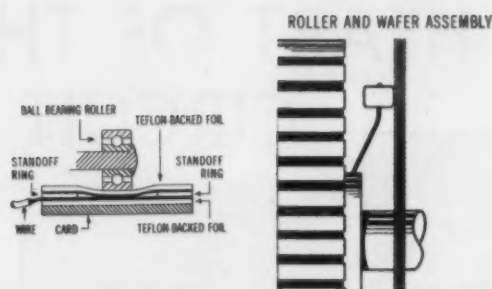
TEFLON-BACKED Gold foils make noiseless contact in new commutator switch. Cross section (left) shows foil diaphragm depressed by bearing. Right-hand view shows drive gear and roller assembly.
